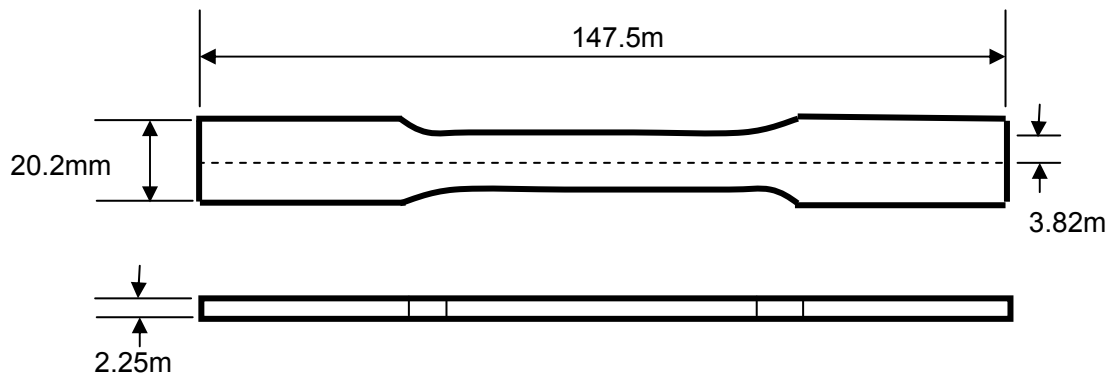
Final dimensions of the IM7/BMI 5250-4 test specimens that were machined with a diamond tip blade at the Wright Patterson Air Force Base machine shop
